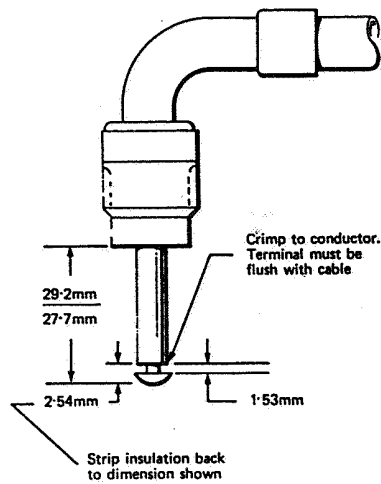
DETAILS OF TERMINAL CRIMP AT MAGNETO END OF IGNITION CABLE
